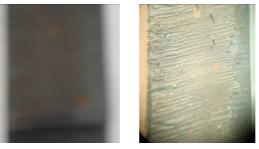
Plasma cut surfaces of steel 65Mn4 (left) and C80U
